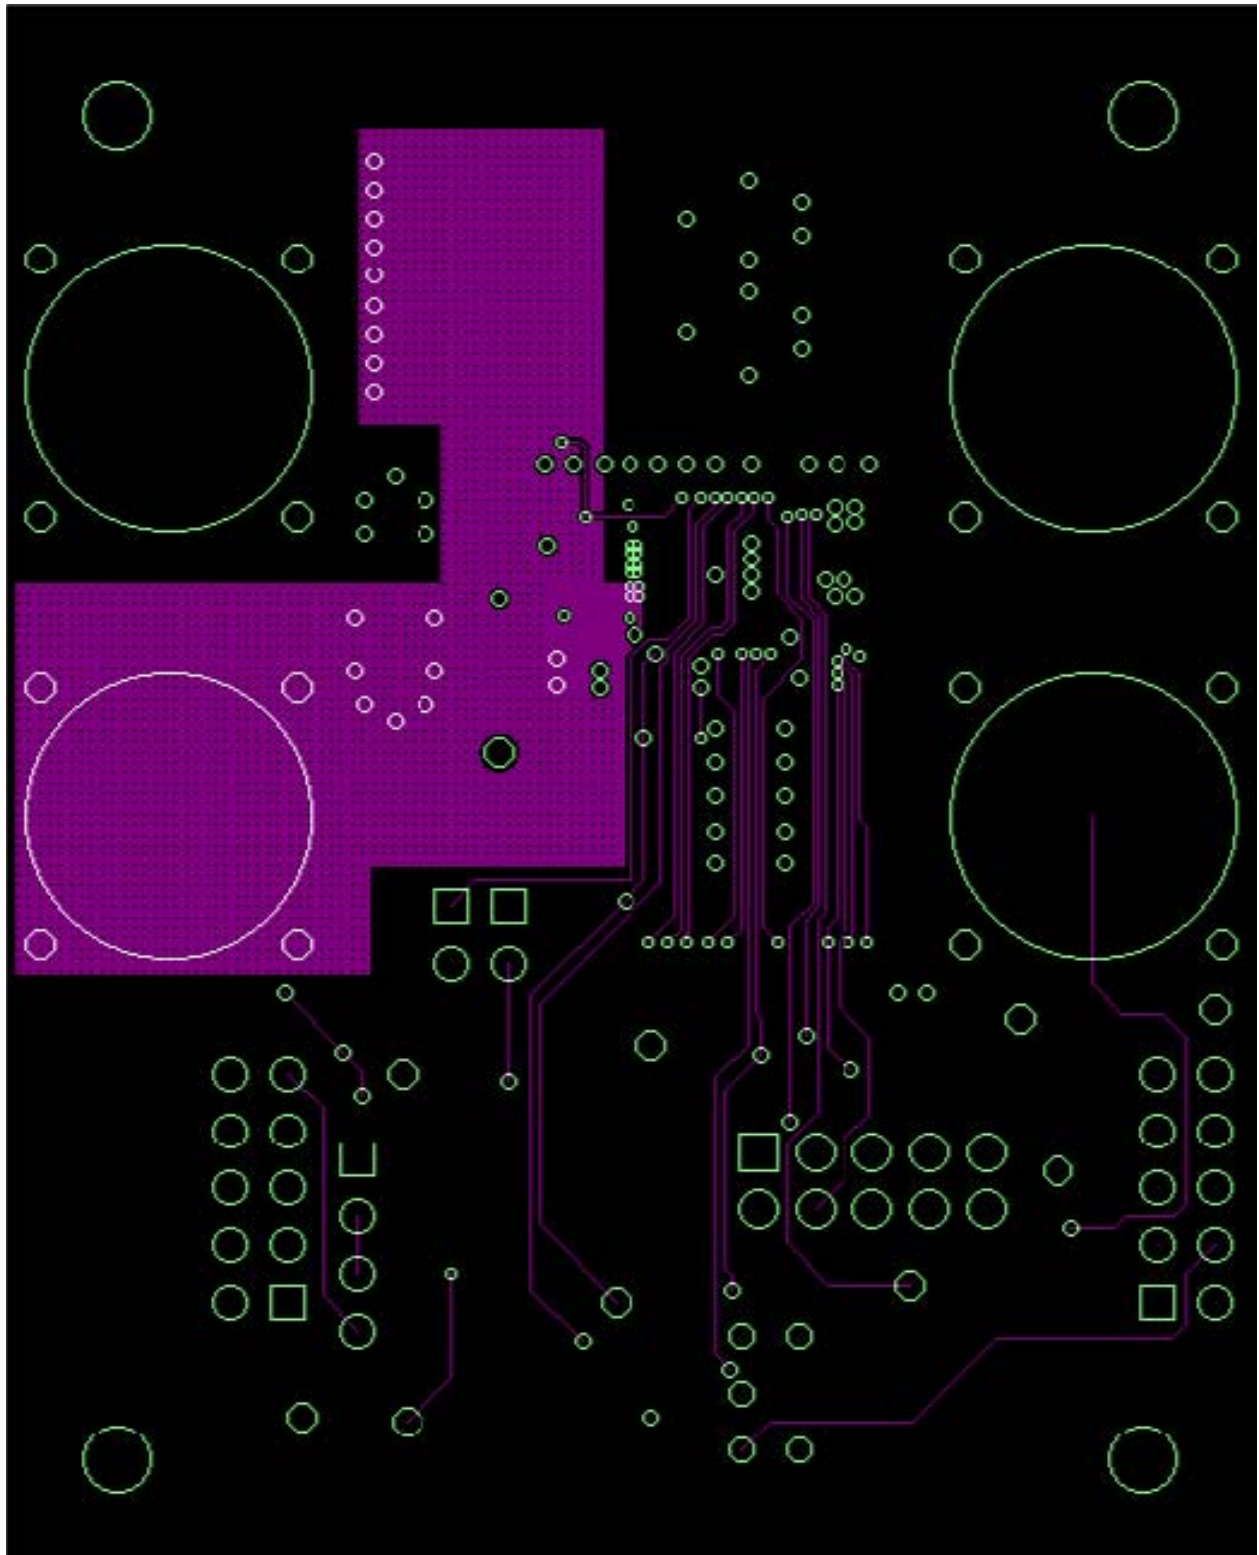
PCB – Inner Layer 2 (Viewed from Top)
